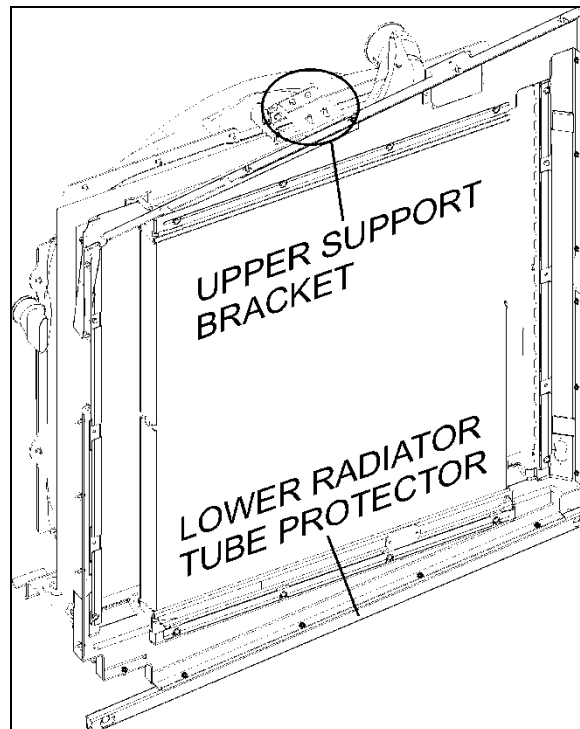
UPPER SUPPORT BRACKET & TUBE PROTECTOR
